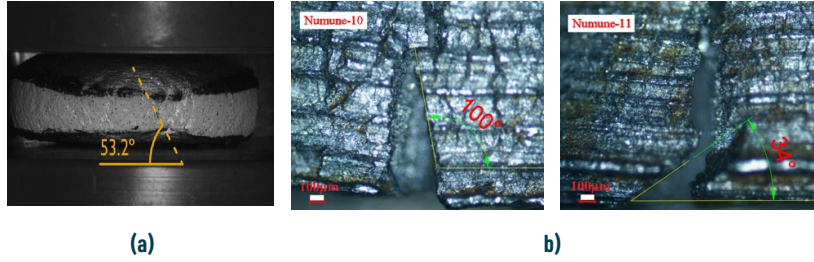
Cracks occurring at an angle perpendicular to the flange plane (a) the Crack angle formed on the flange, Sampaio et al. [13] (b) Crack angles of samples numbered 10 and 11 at 50x zoom
